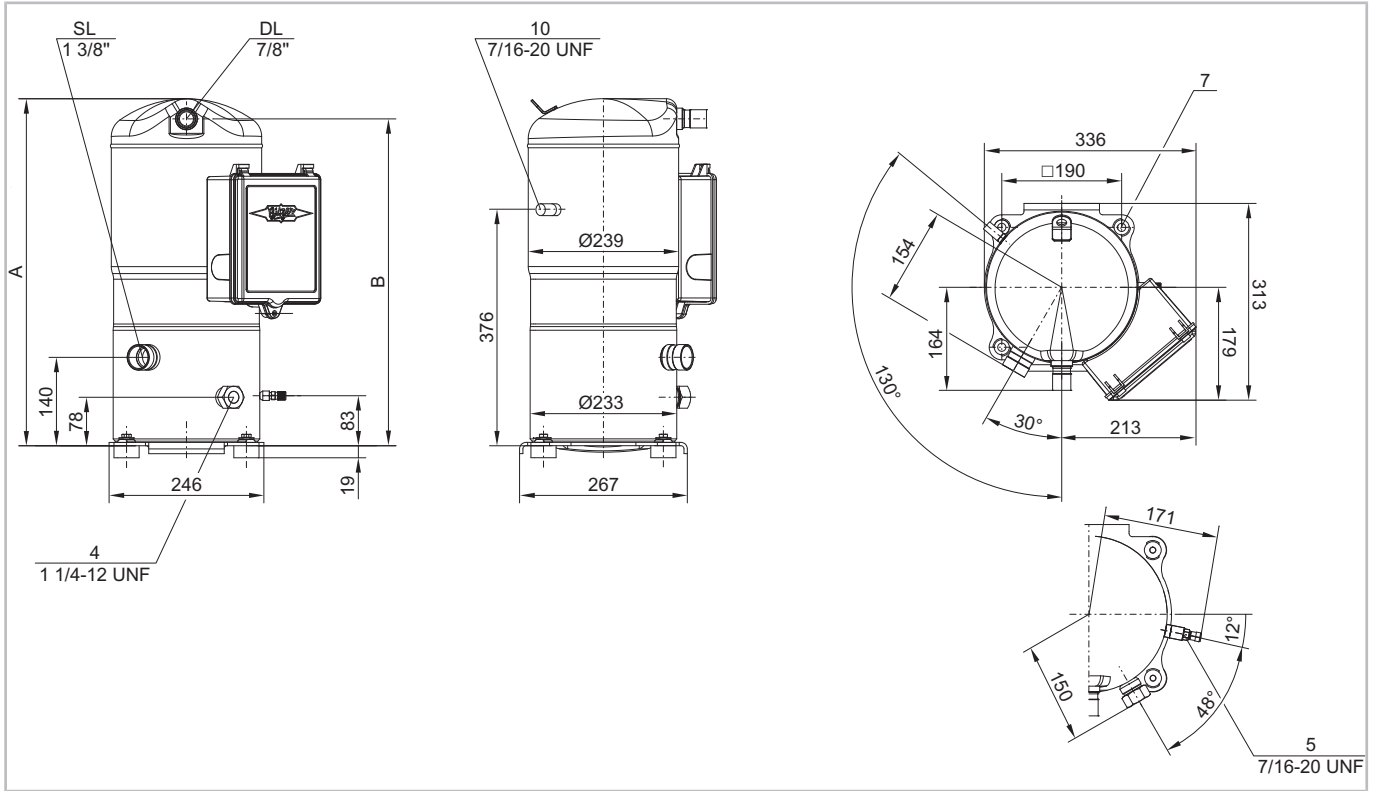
Dimensional drawing ORBIT FIT: GED60120 .. GED60235
